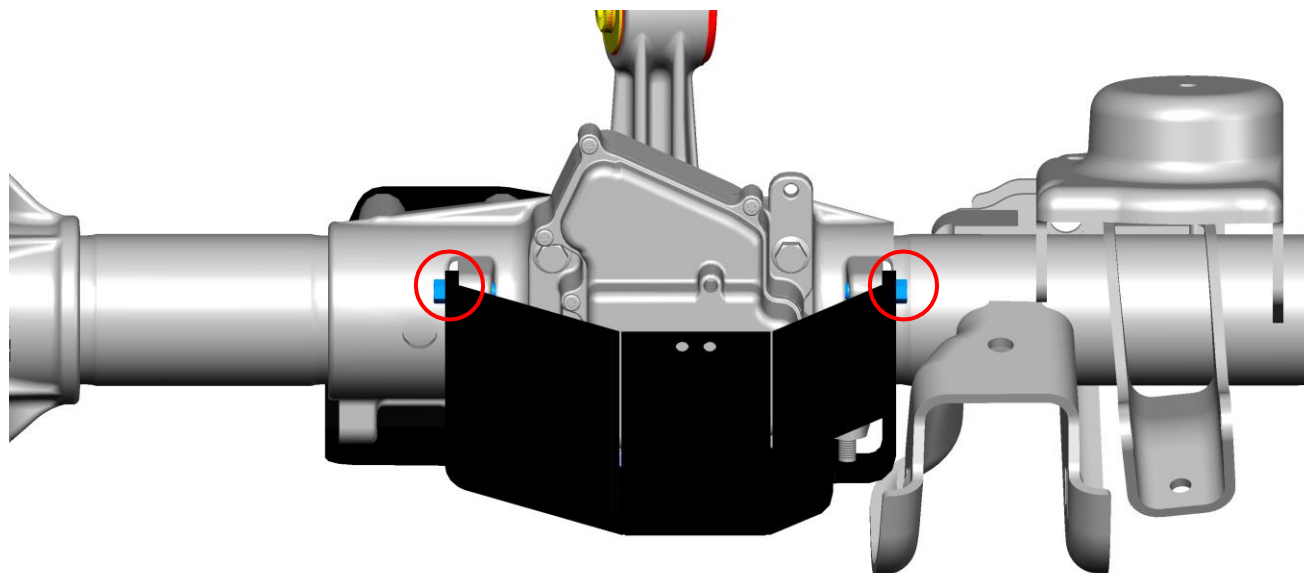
Factory skid plate bolts installed on new FAD skid plate (rear)
